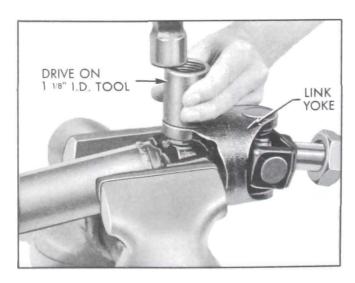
Driving Universal Joint Bearing from Link Yoke
